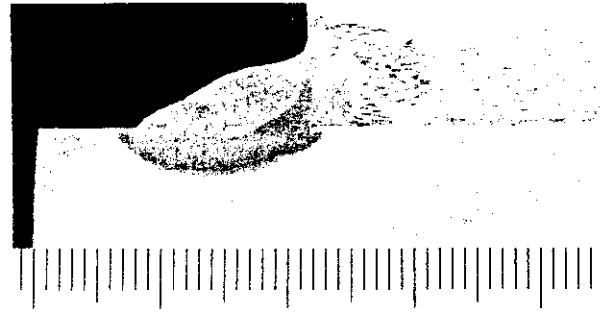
Cross section of the transverse fillet weld by the use of D 5026 electrode
